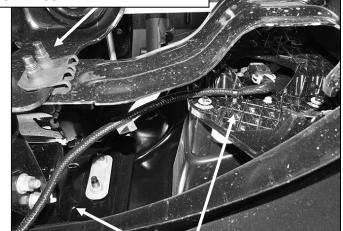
Driver side lower frame extension and fog light wire harness pictured from behind bumper
